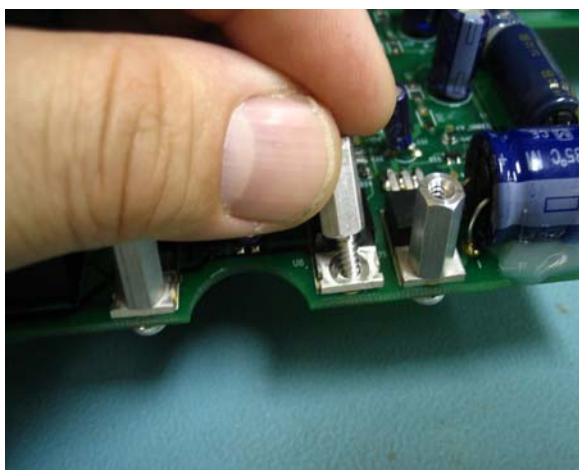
Install standoff (30-12-0007) on the bottom side of the pcb.
